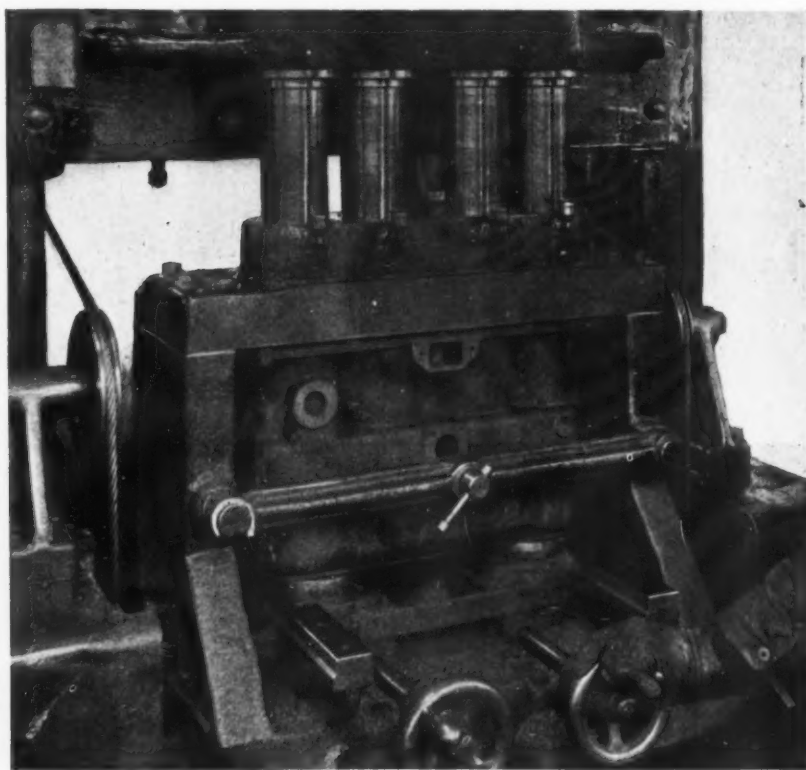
First cut on the boring of the cylinder casting, which operation follows the reaming of the valve stem holes and the valve tappet bushings
